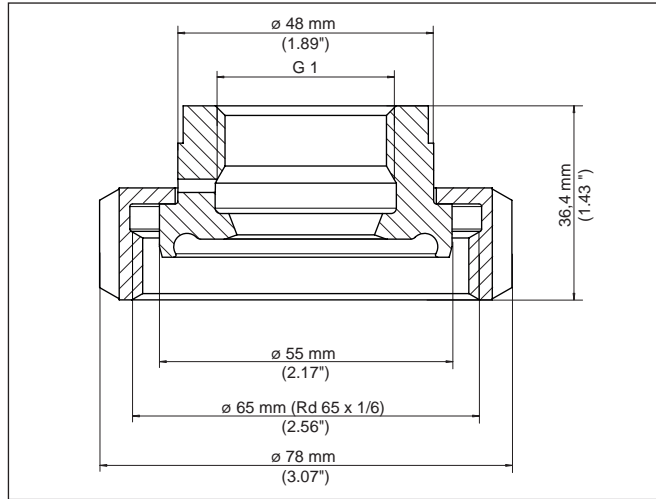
Dimensions hygienic adapter G $\frac{1}{2}$ (DIN 3852-X) on slotted nut DN 40 (DIN 11864-1) PN 16 - Cone seal
